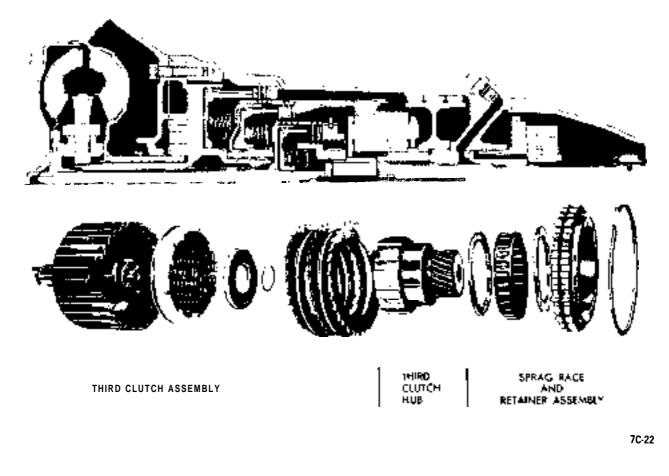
C-22 Third Clutch Drum, Piston and Springs, Clutch Plates, Input Sun Gear. Sprag Race And Retainer Assembly
